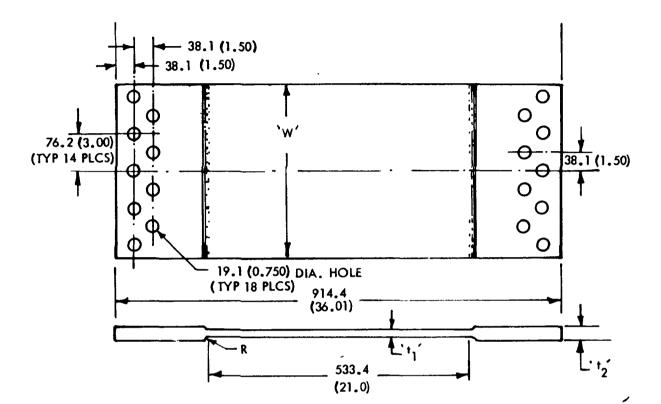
BASE AND WELD METAL SPECIMENS
